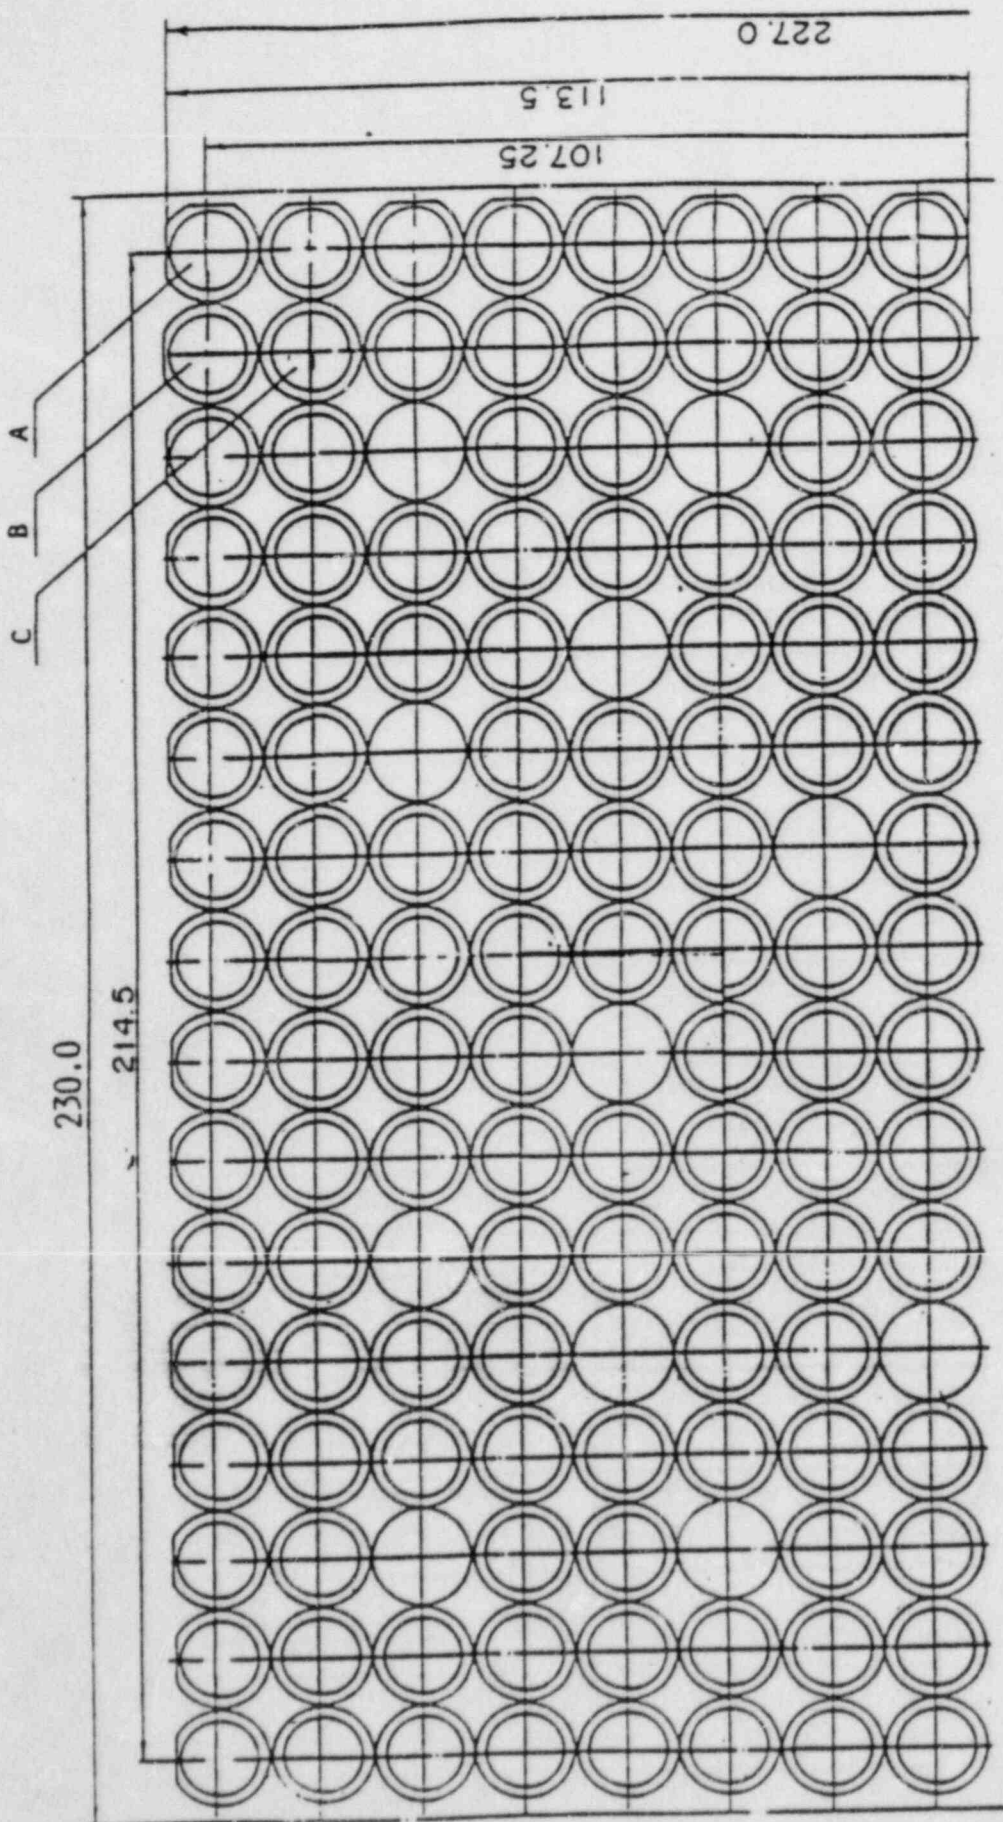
Arrangement of the Heater Rods with Three Kinds of Blockage Sleeve
